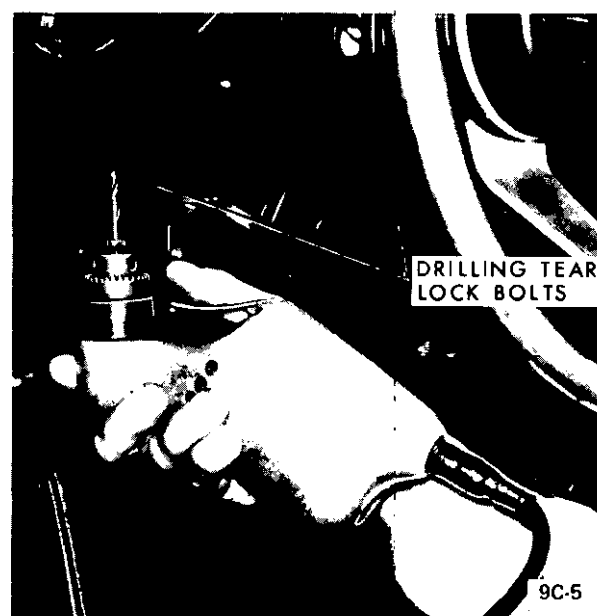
C-5 Drilling Pilot Hole into Tear Lock Bolts
